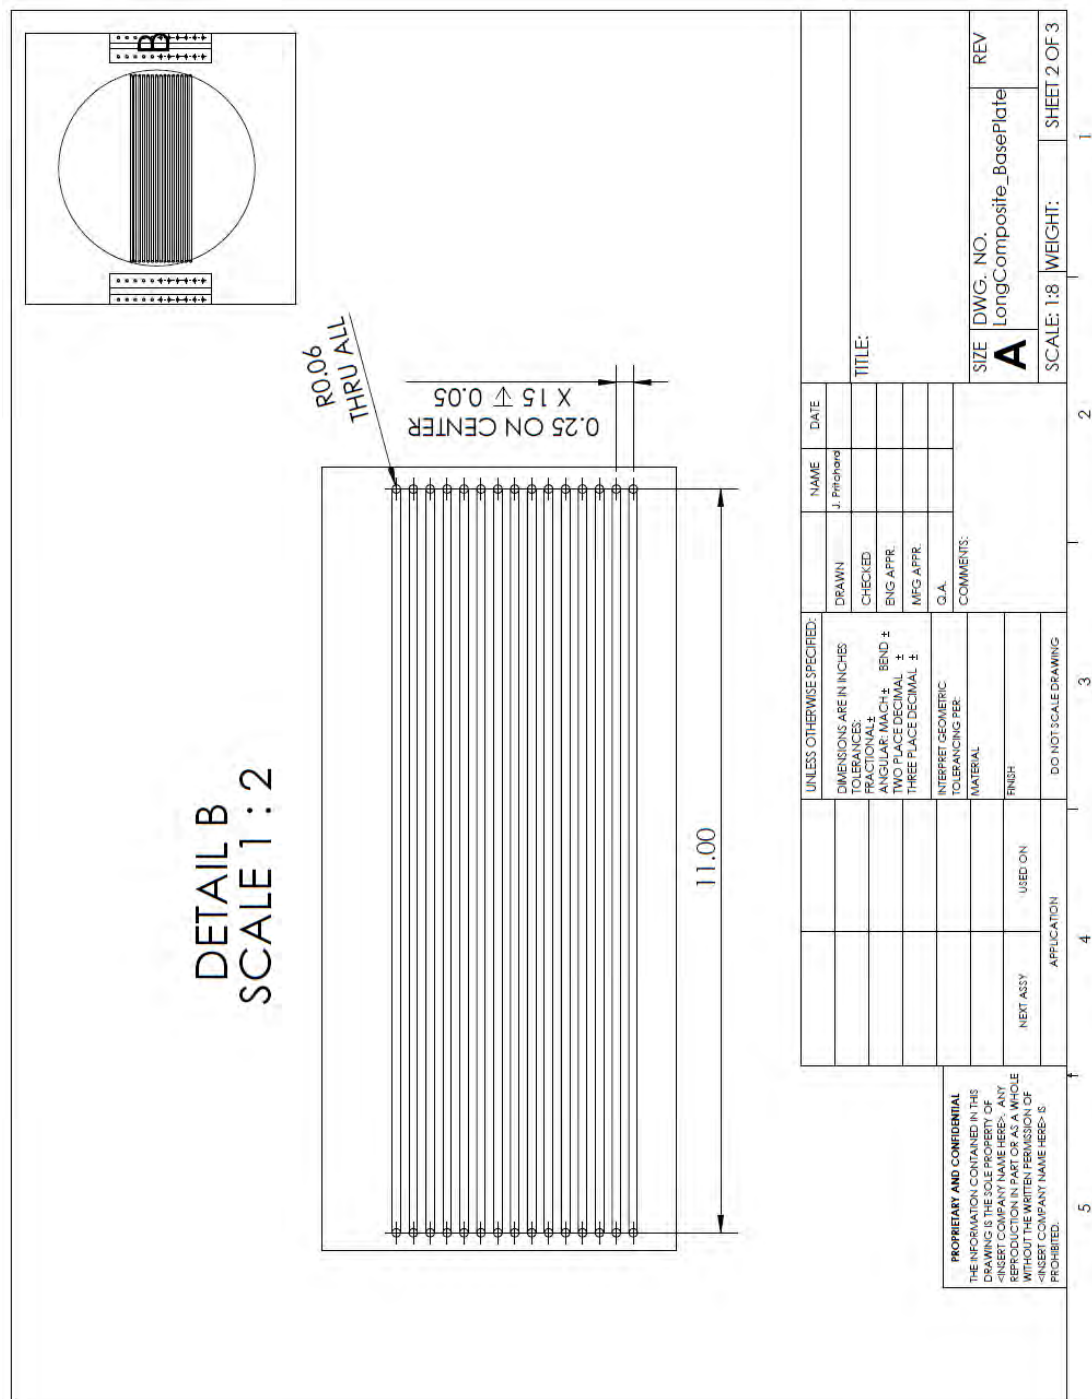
Dimensional drawing of base plate for producing large geometry samples.
